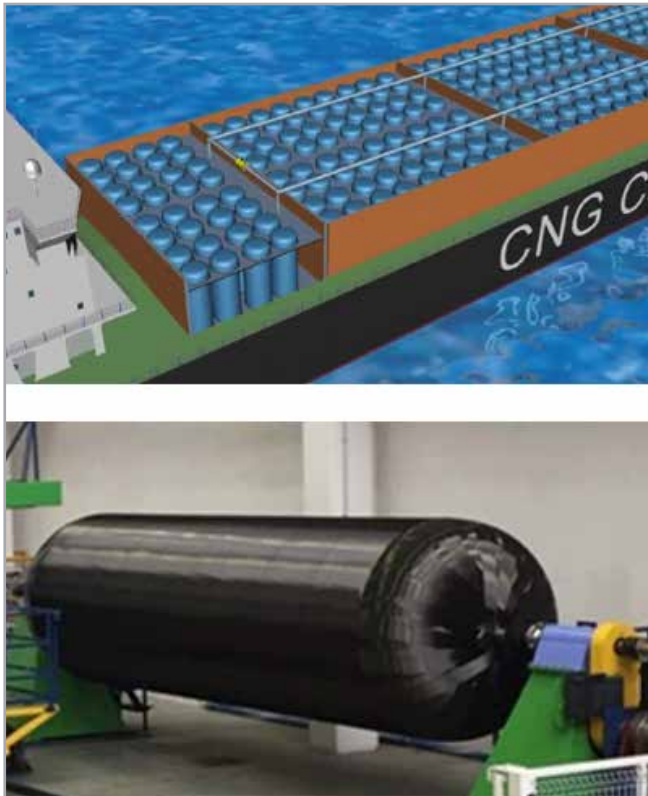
Gasvessel CNG carrier - Pressure vessels manufactured using filament winding
